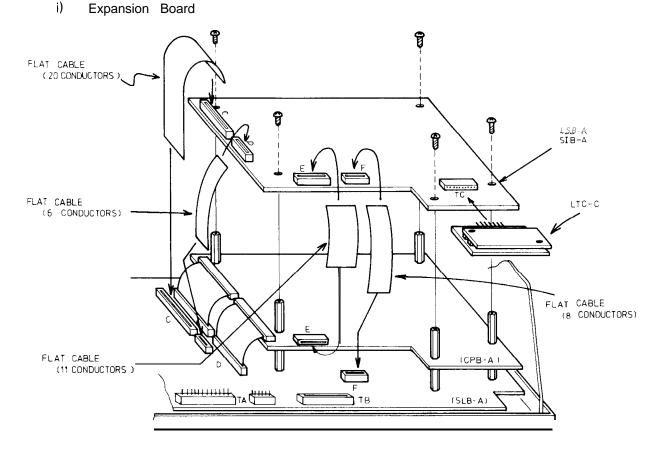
EXPANSION BOARD INSTALLATION (SIB-A, 4SB-A)
